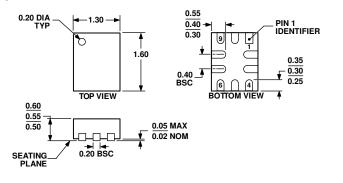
10-Lead Lead Frame Chip Scale Package (LFCSP\_UQ) 1.3 mm × 1.6 mm Body, Ultra Thin Quad (CP-10-10) Dimensions shown in millimeters
